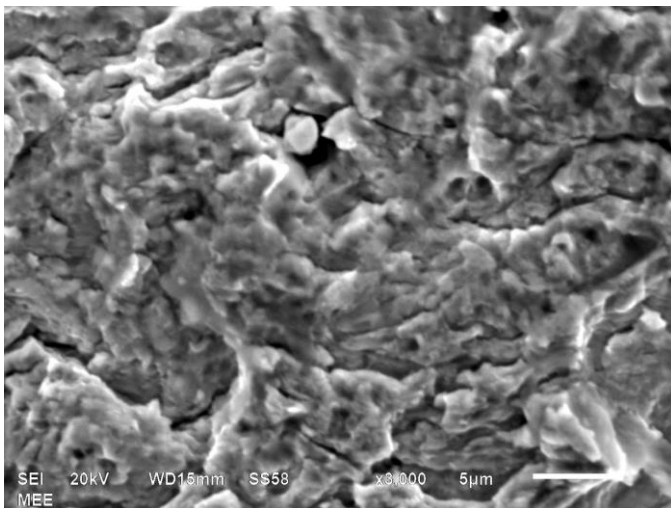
3000X Fracture Surface near Overload Band
